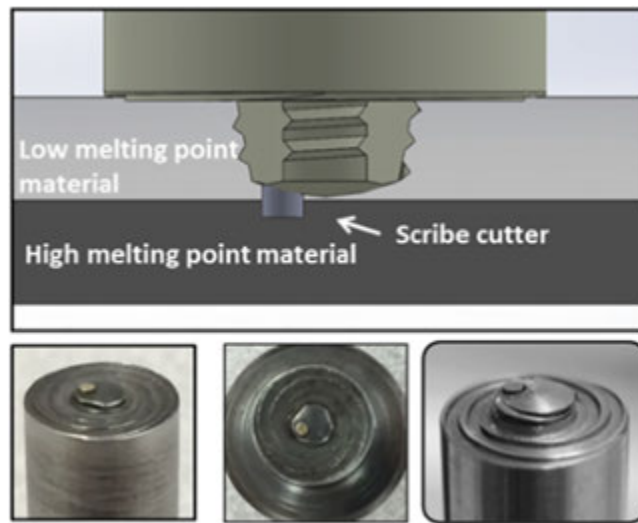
Schematic of FSS tool as it plunges into a dissimilar material lap joint (above) and different FSS tools (below). Reproduced from Upadhyay, P., *et al.*, 2017. Joining dissimilar materials using friction stir scribe technique. *Journal of Manufacturing Science and Engineering, Transactions of the ASME* 139 (3), 8–10.
